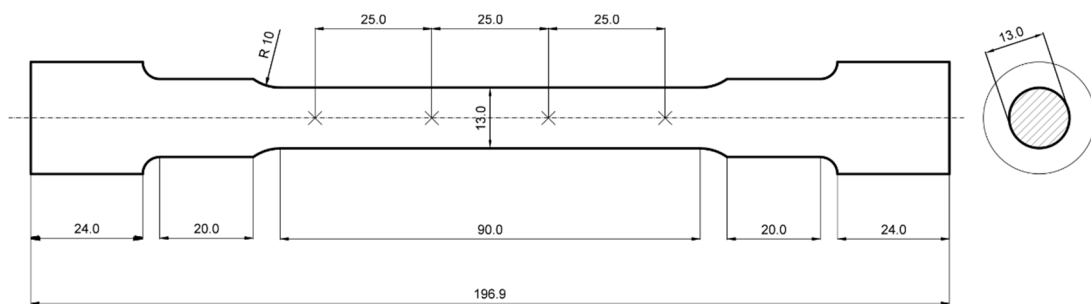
Cylindrical “dog-bone” steel specimen samples drawing, dimensions in mm.
